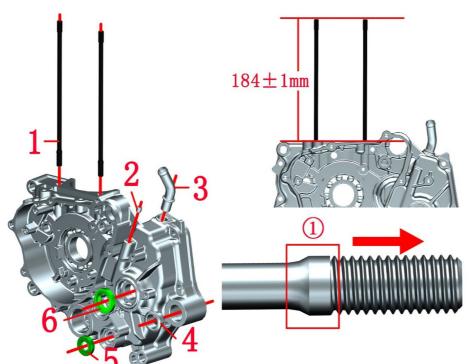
LEFT CRANKCASE		ZT158MJ Left crankshaft box assembly-5	CHK	(0)
